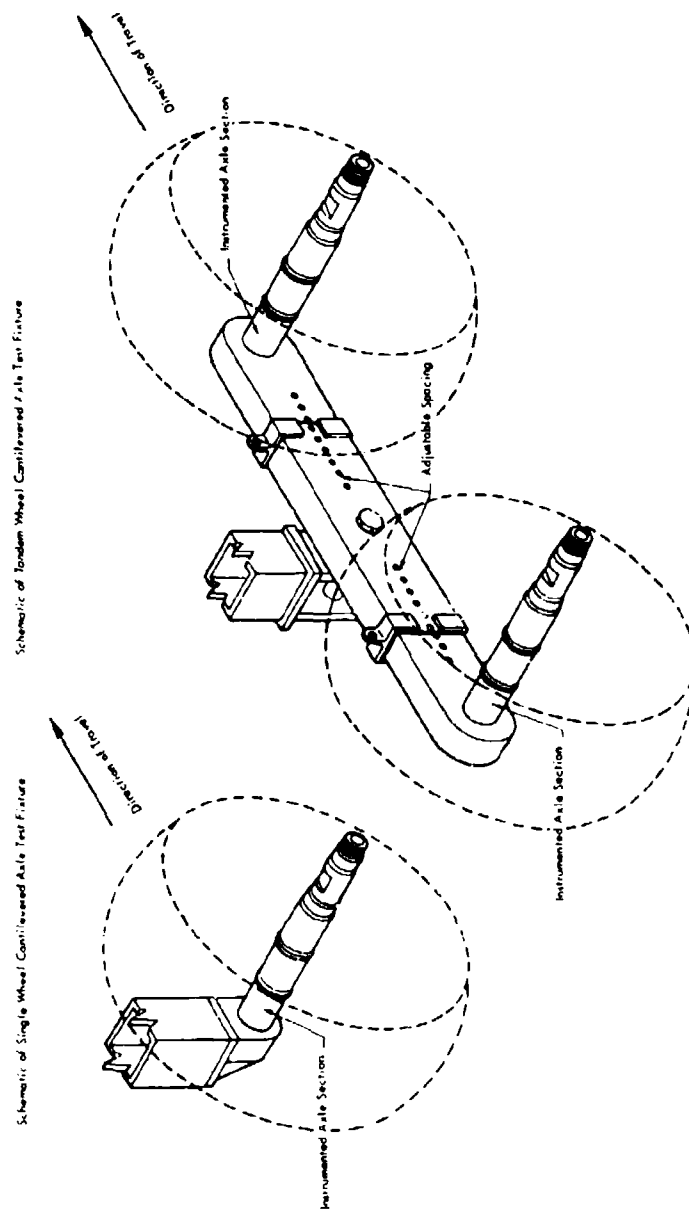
Schematic of the Single and Tandem Wheel Cantilevered Axle Test Fixtures
